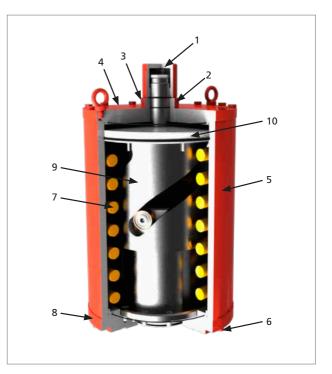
Pneumatic compact spring return actuator – Type B: threaded flanges parts description
